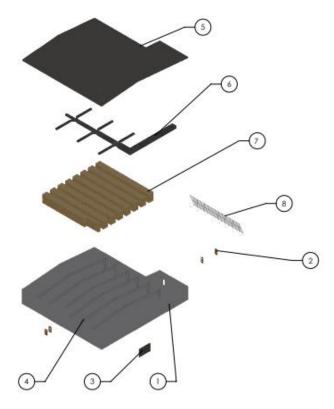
Final honeybee overwintering building - exploded view of primary parts
